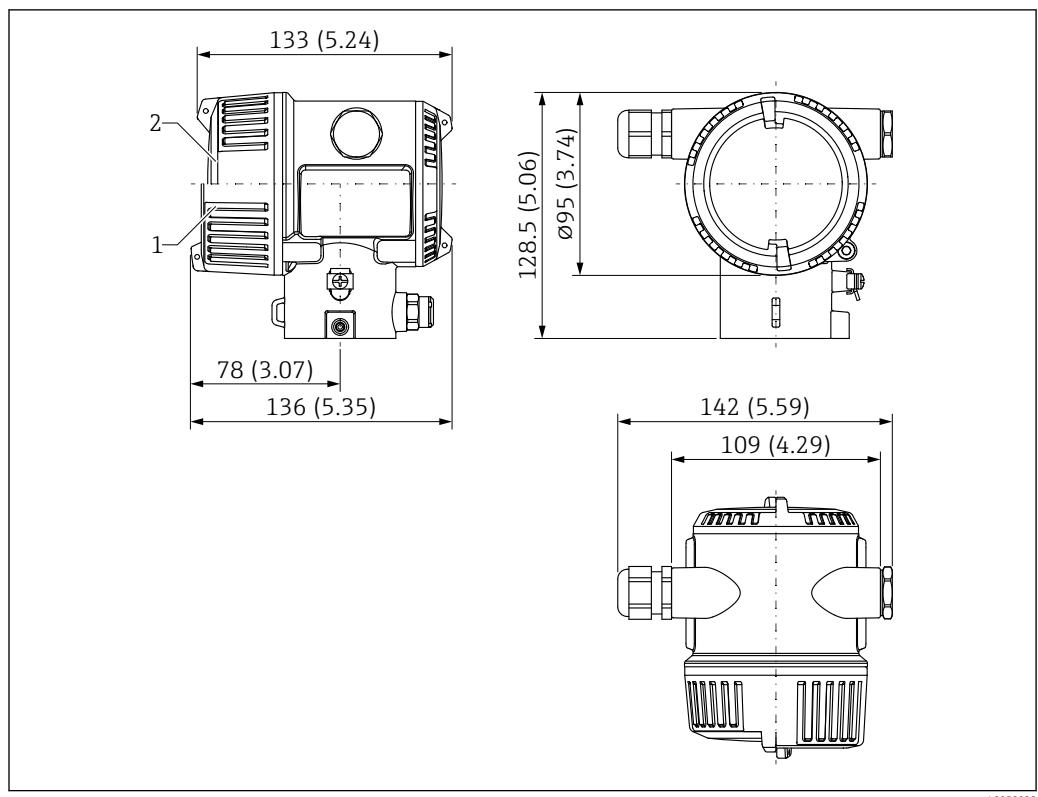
Dimensions; dual compartment housing L-shaped, 316L; incl. M20 coupling and plug, plastic. Unit of measurement mm (in)
